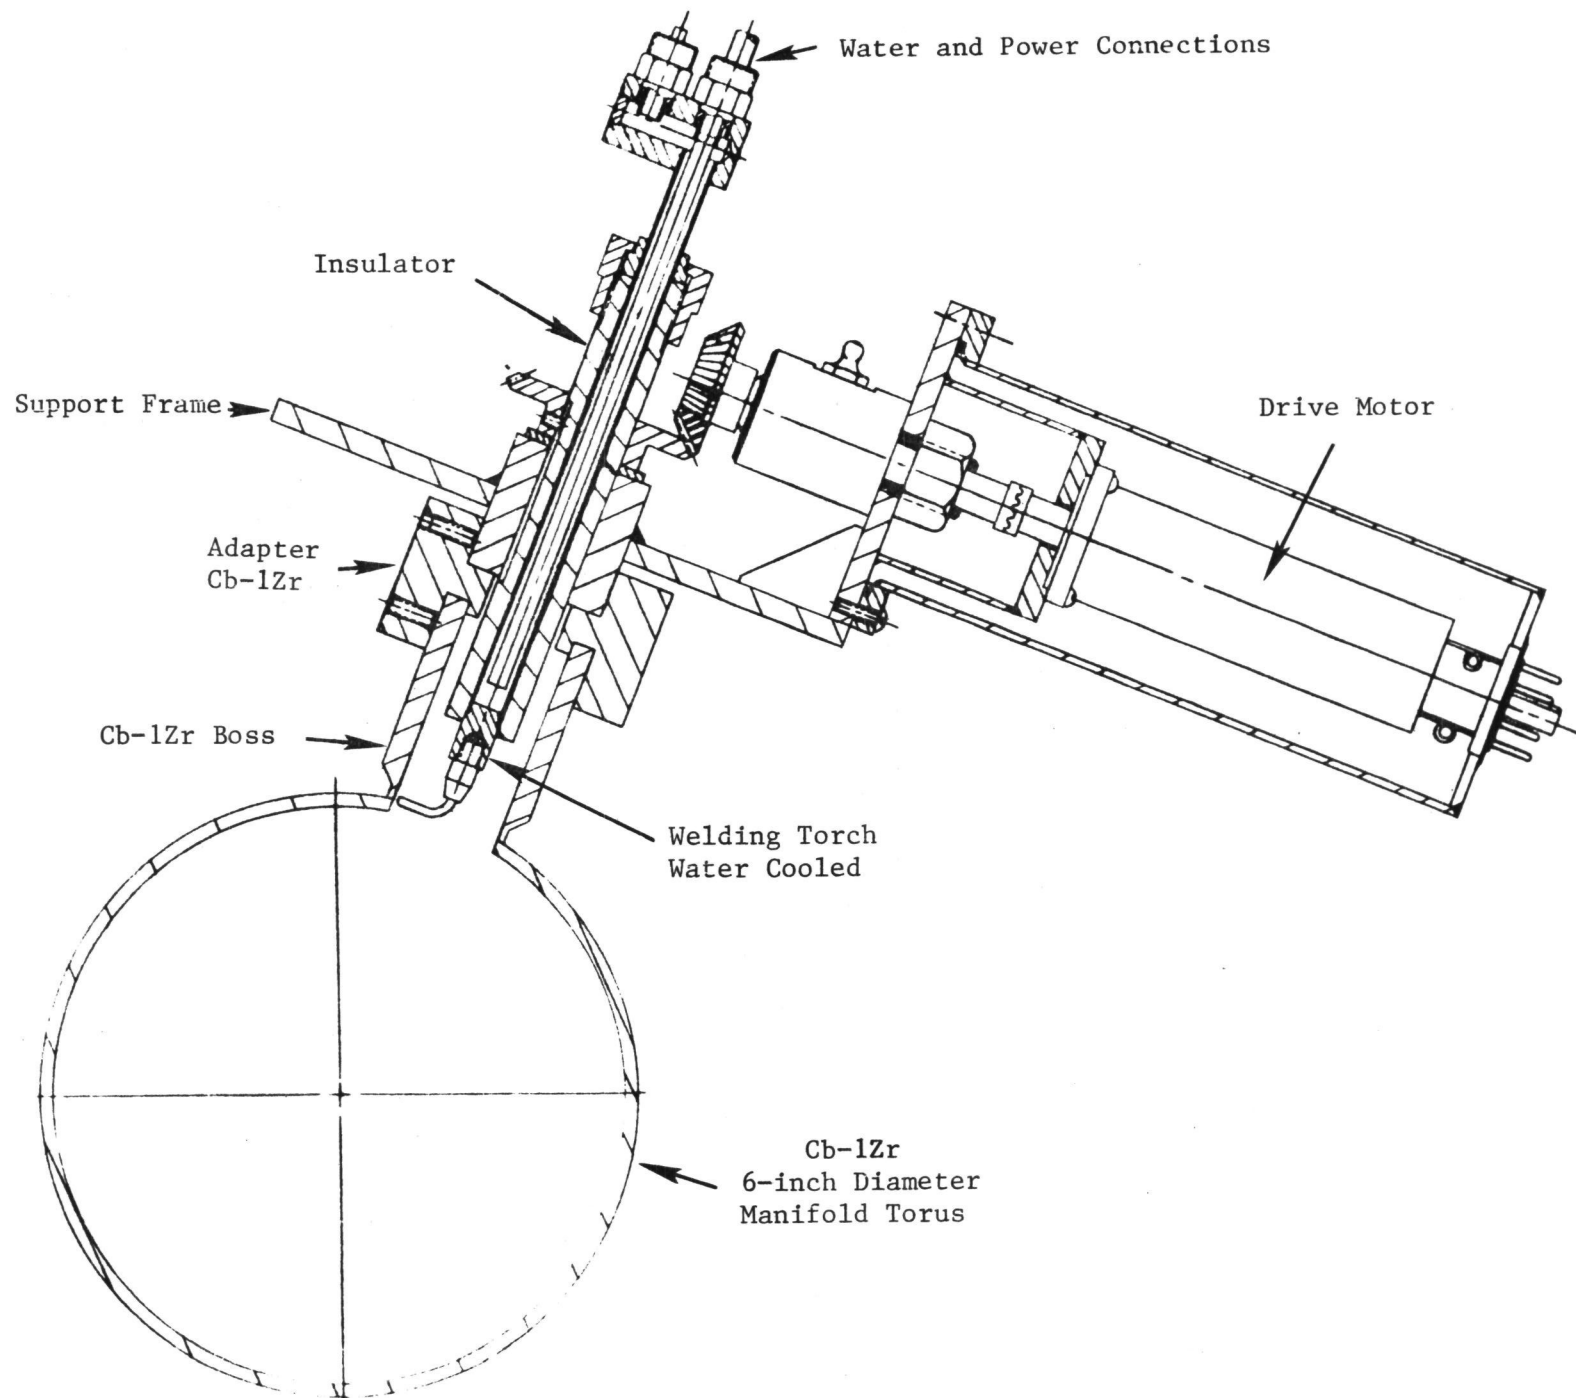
Internal Rotary GTA Welding Torch.
